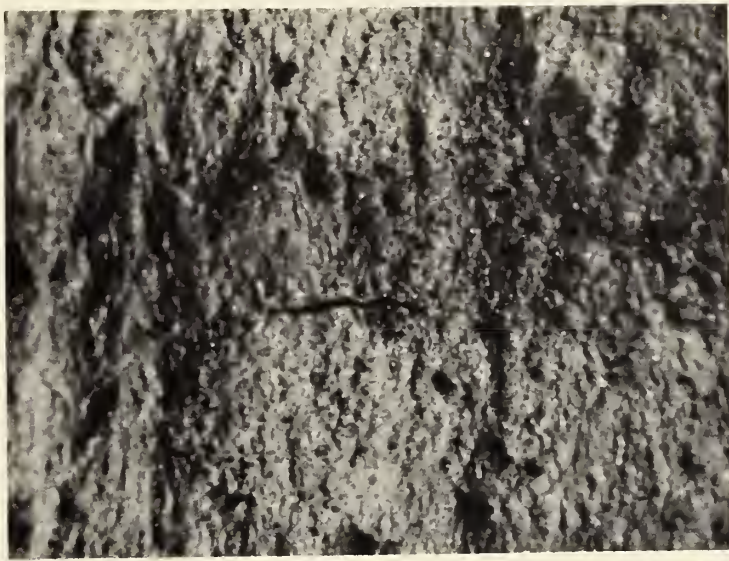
Crack on hole surface of eye C⁴. 20 X
